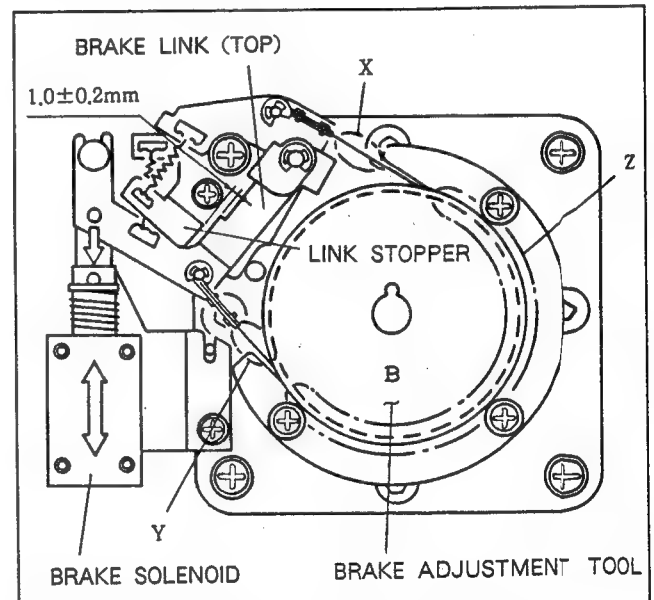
Link Stopper/Brake Solenoid Position Adjustment
